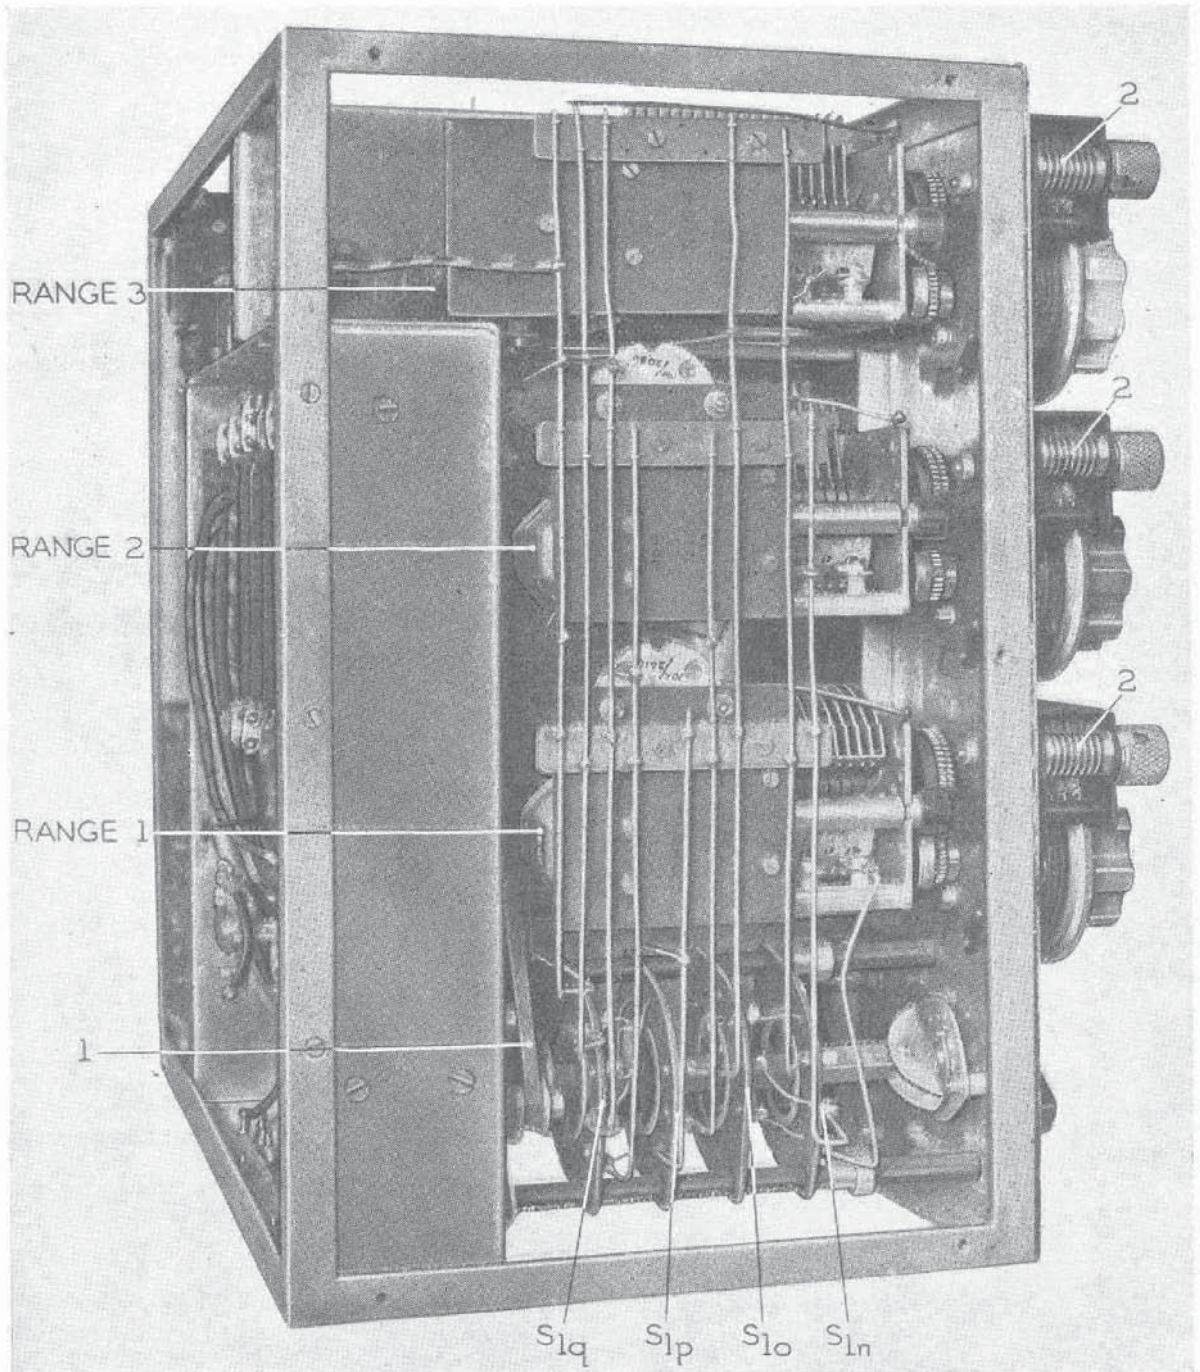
SIDE VIEW OF TRANSMITTER CHASSIS
